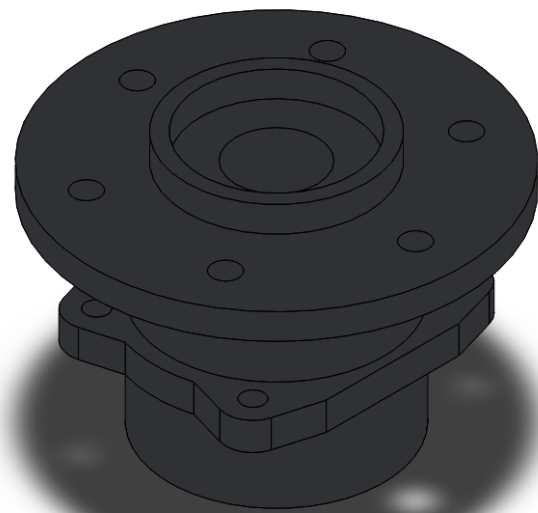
CAD model of the main bearing, reproduced from metrology work carried out in-house.
